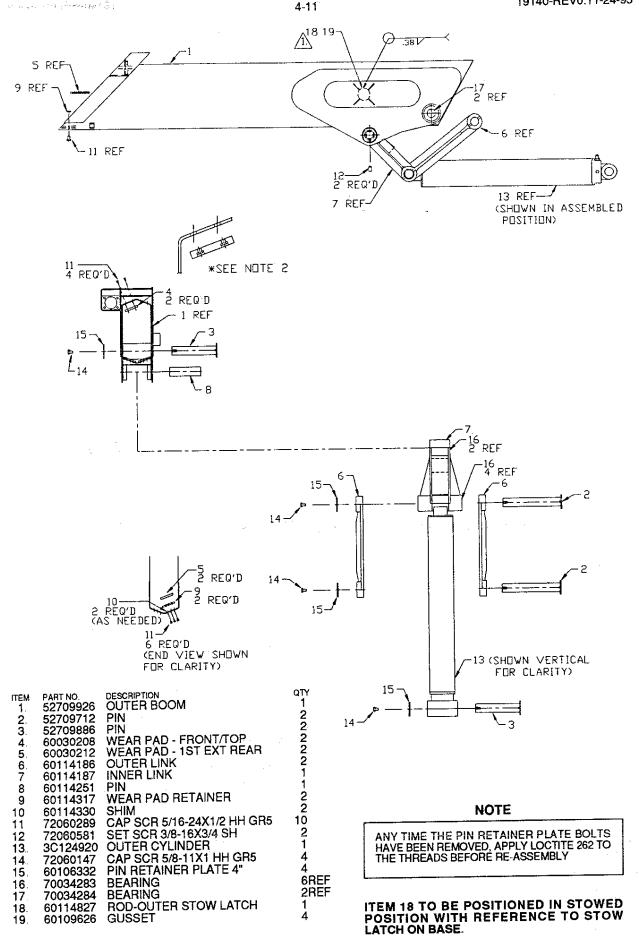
OUTER BOOM ASSEMBLY (41710030)
